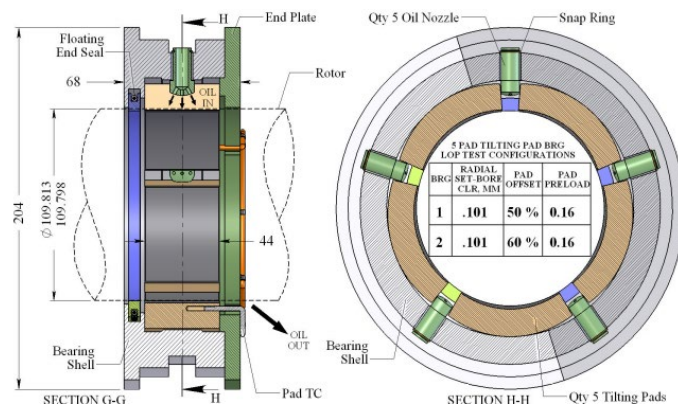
Cross-section of a 5-pad tilting pad bearing showing geometric parameters.
